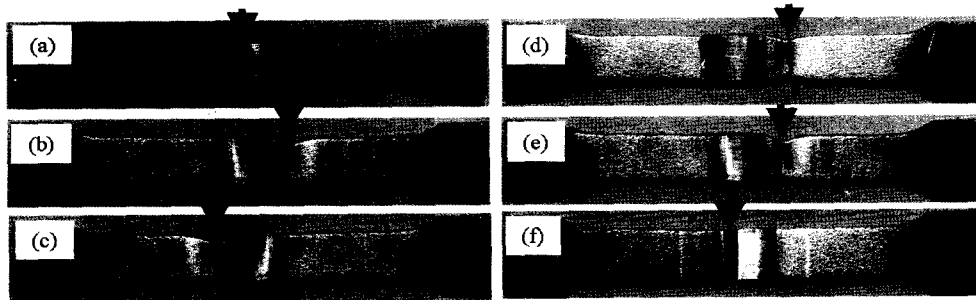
Fractured specimens after transverse tensile test with various welding conditions
